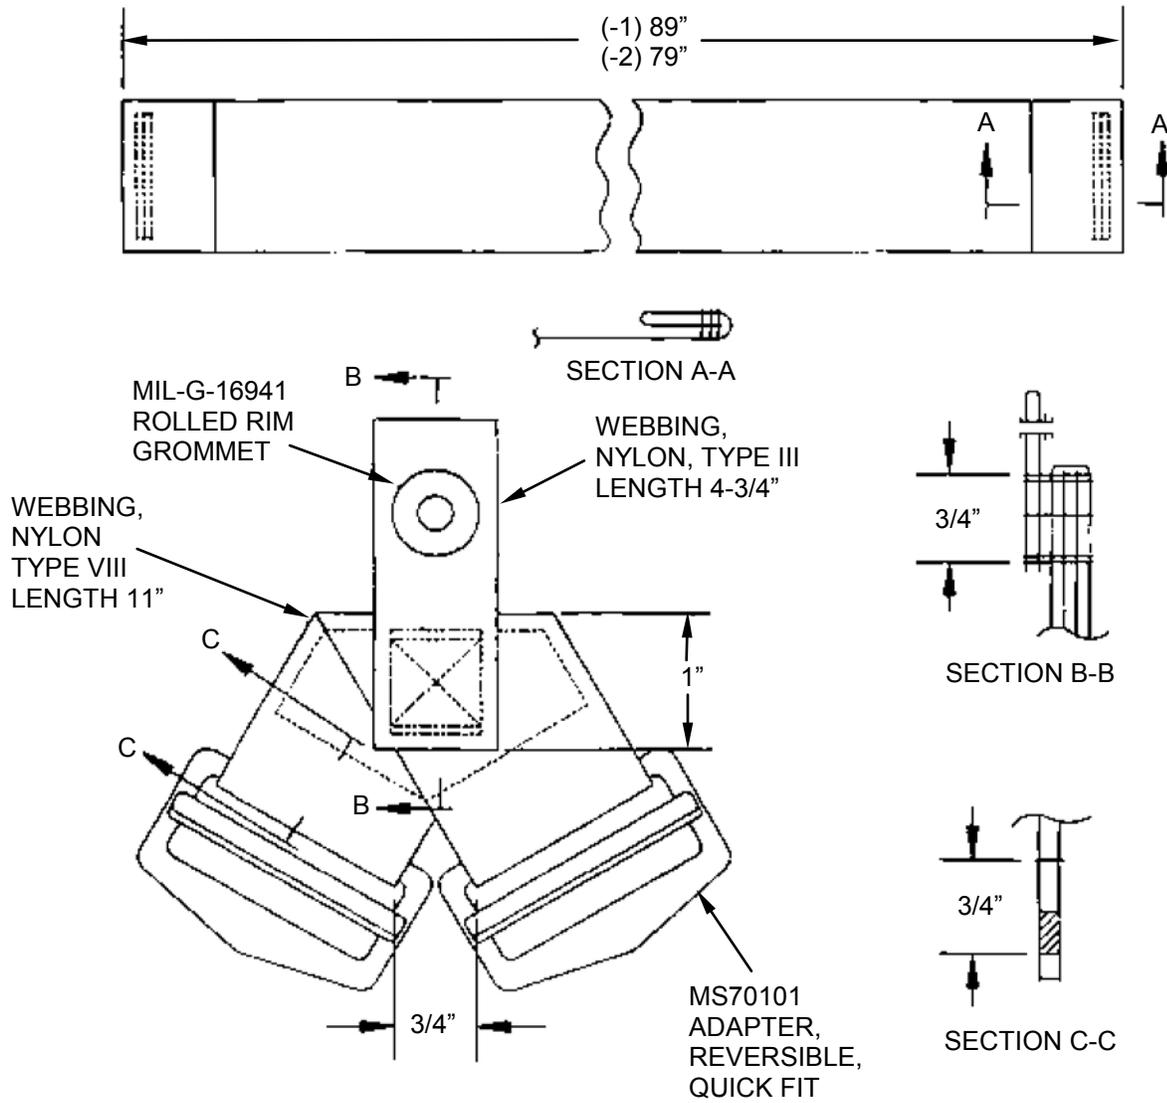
(CONTAINER FRONT MOUNTED) VERTICAL RESTRAINT ASSEMBLY (SHEET 3 OF 3)
